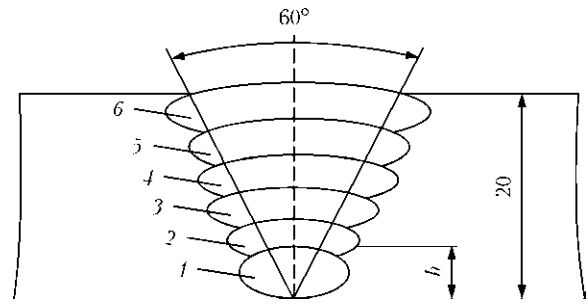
Schematic of layer-by-layer welding-up of butt joint by multipass arc welding: 1–6 – number of passes
